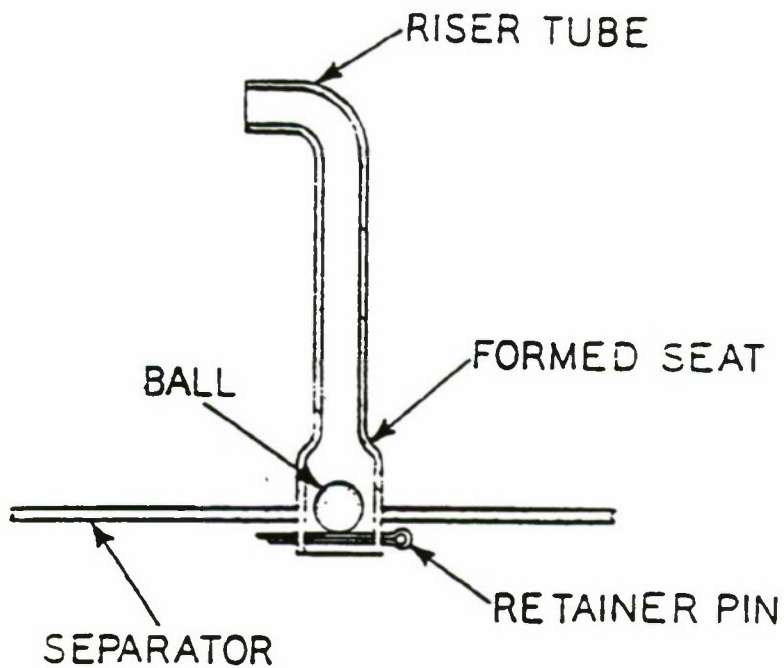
Surge Tank Riser Tube Ball Check Bleed Valve
